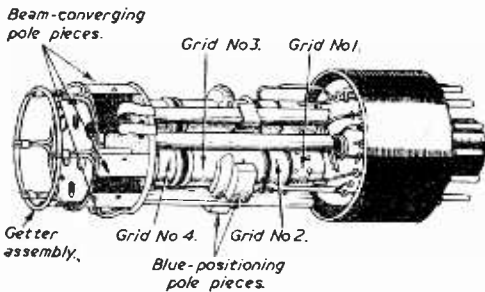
A sketch of the 'gun' assembly of a modern colour C. R. Tube.
